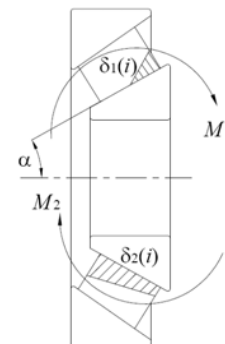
Deformation of the tapered roller bearing under bending moment.
